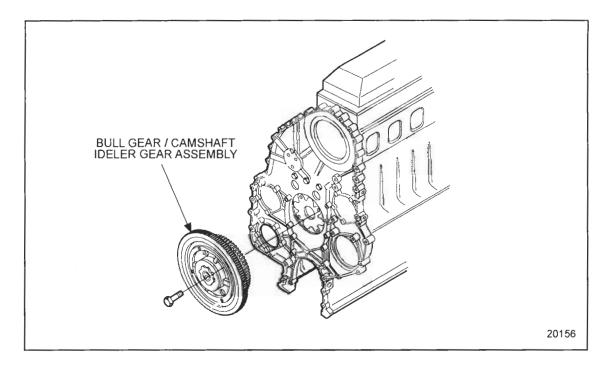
Bull Gear and Camshaft Idler Gear Assembly
